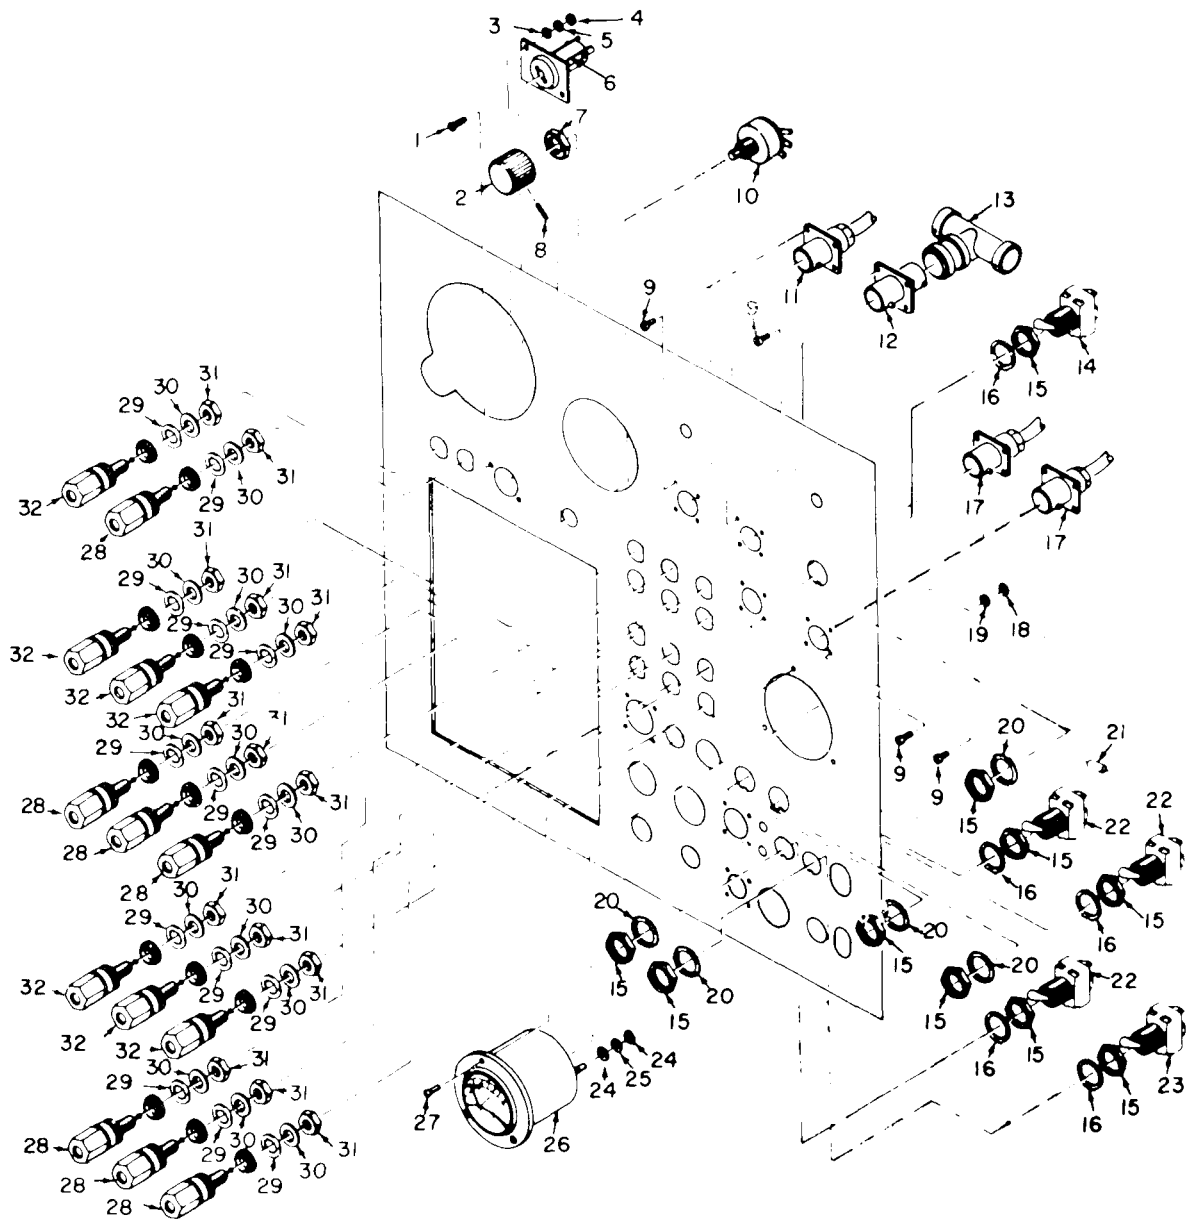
Test Set, Radio TS-2575/ARC-131, Front Panel Rear Exploded View.
